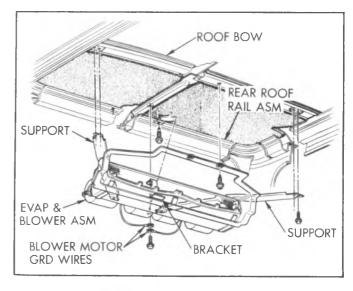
B-66-Blower-Evaporator (G Overhead System)
